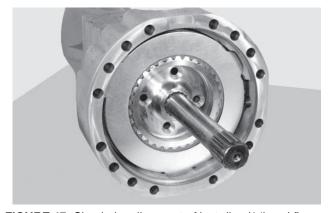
Check the alignment of last disc (14) and flange (17).
